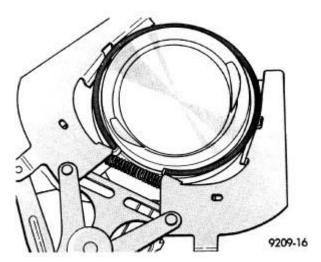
Removing/Installing Piston Rings Courtesy of CHRYSLER LLC
